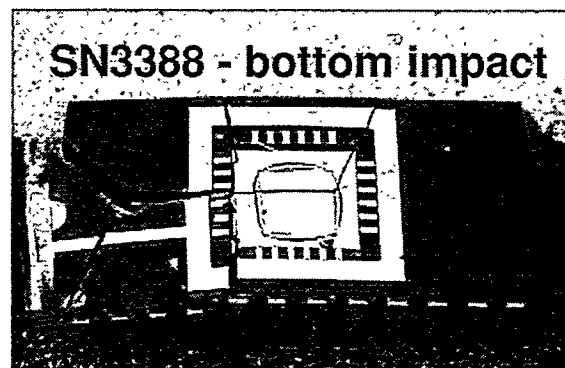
The 40Kg impact from the bottom fractured the package. The die was removed and tested.
